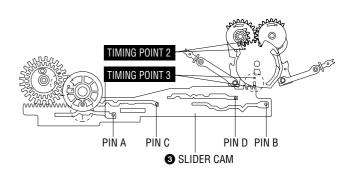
Gear Loading Drive, Slider Cam, Lever Load S, T Ass'y Assembly
